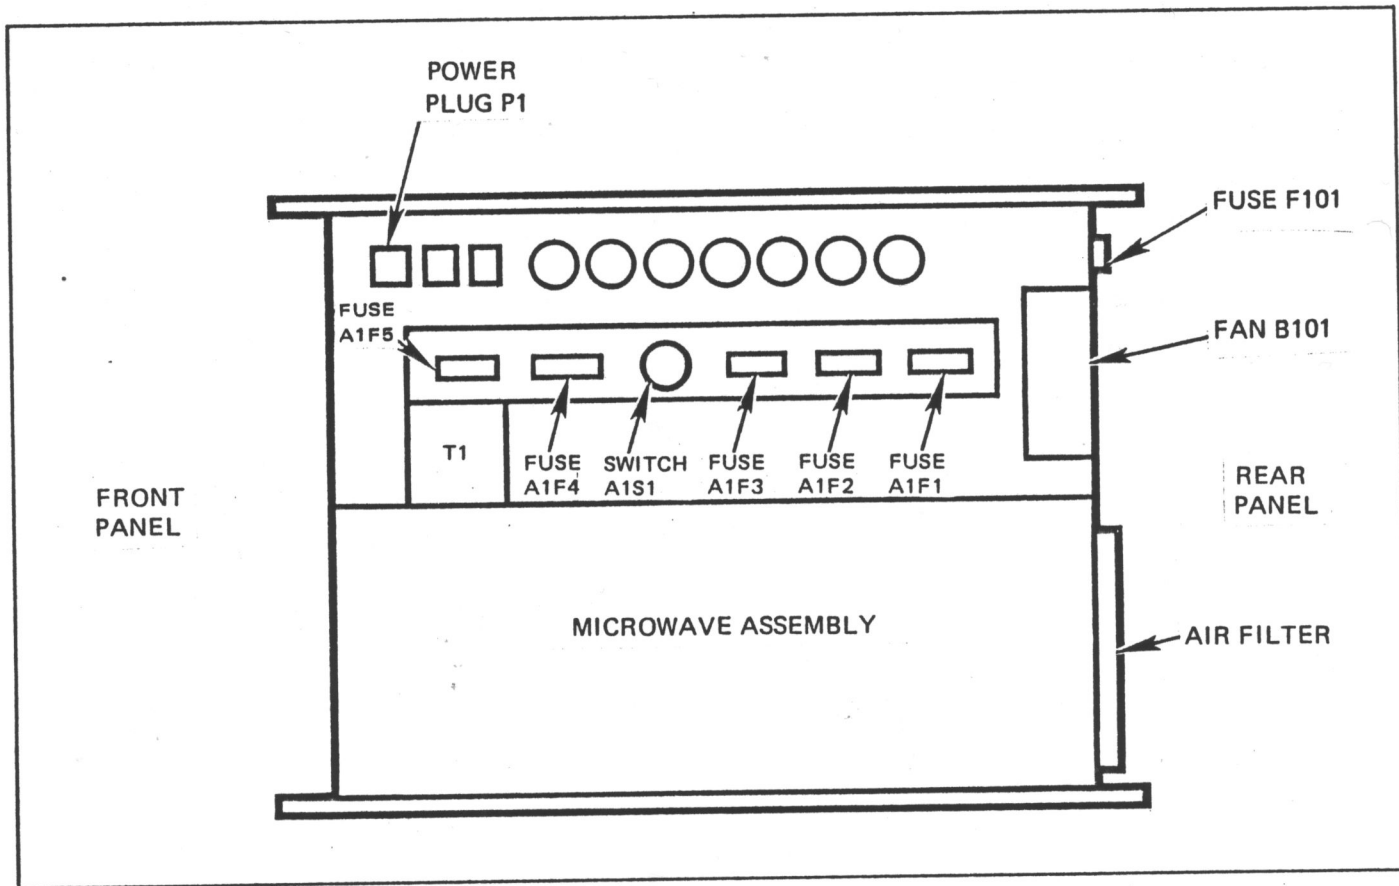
Plug P1 and Fuse Locations, Top View, Model 1626
